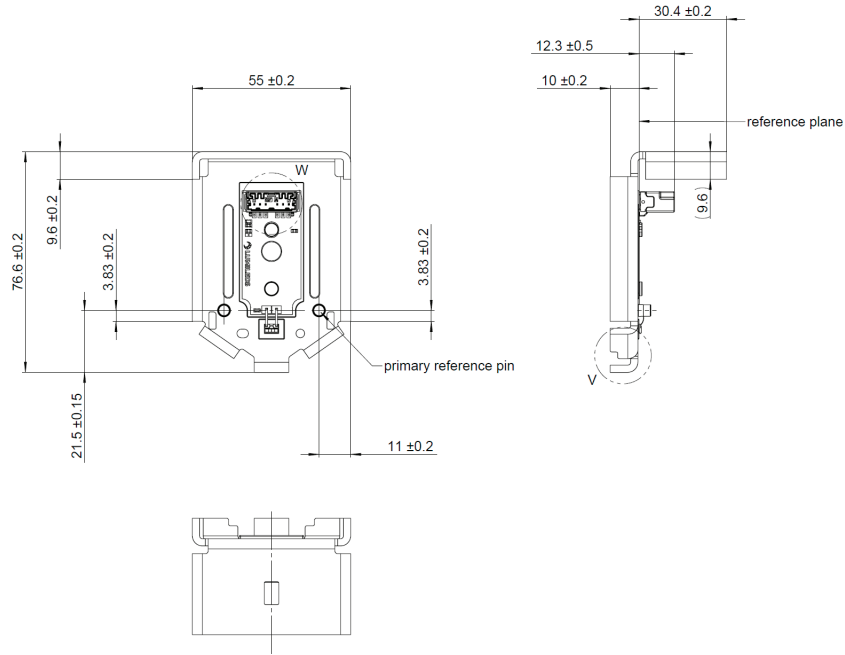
Mechanical dimensions in mm of the LUXEON Go 1x4 master module with heatsink type A
